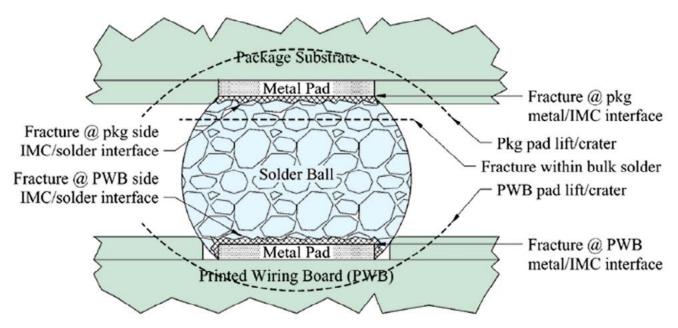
Failure modes in BGA solder joint systems<sup>[5]</sup>.
